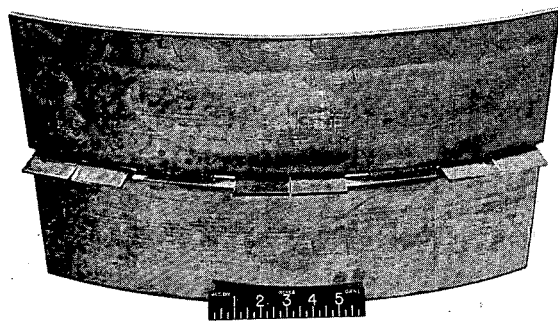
Simulated Weld-Shrinkage Hoop Test, Illustrating Tool-Steel Spacer Locations.
